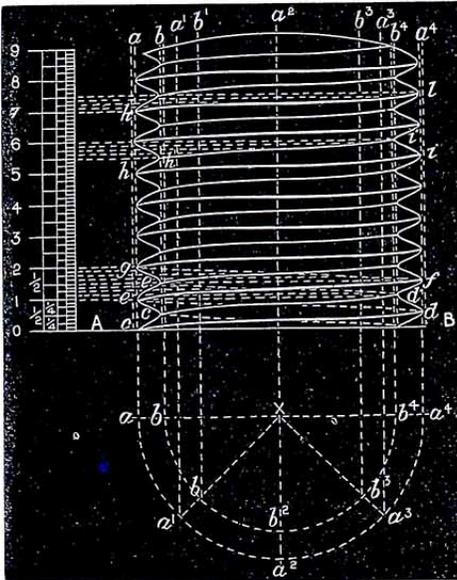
Single-Thread V-Screw ( $1\frac{1}{2}$  in. diam.).
